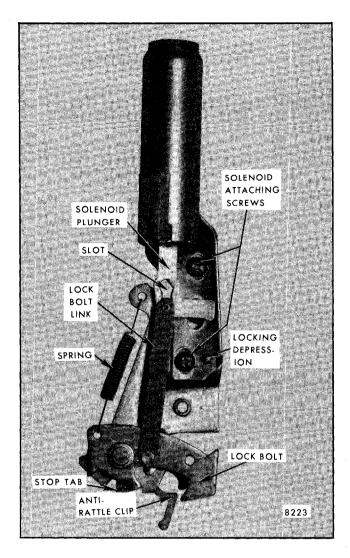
Front Seat Back Electric Lock Solenoid and Support Assembly - E Body Styles
